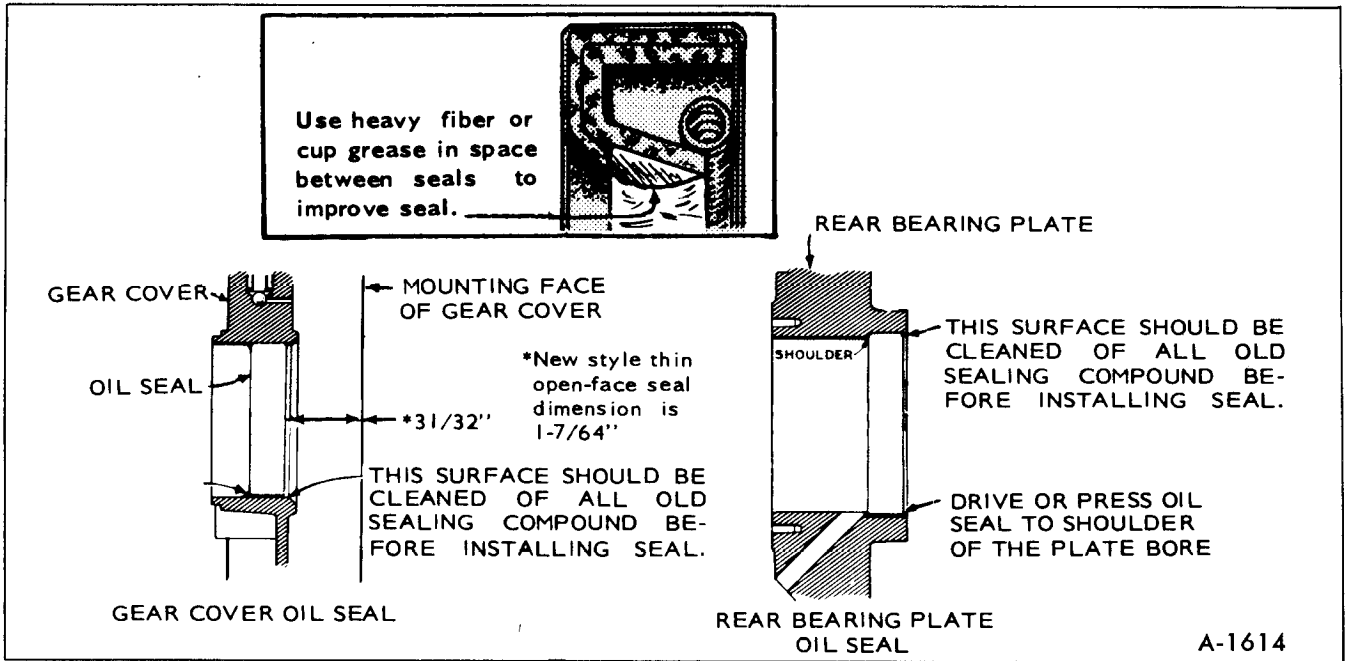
Gear Cover and Rear Bearing Plate Oil Seals
